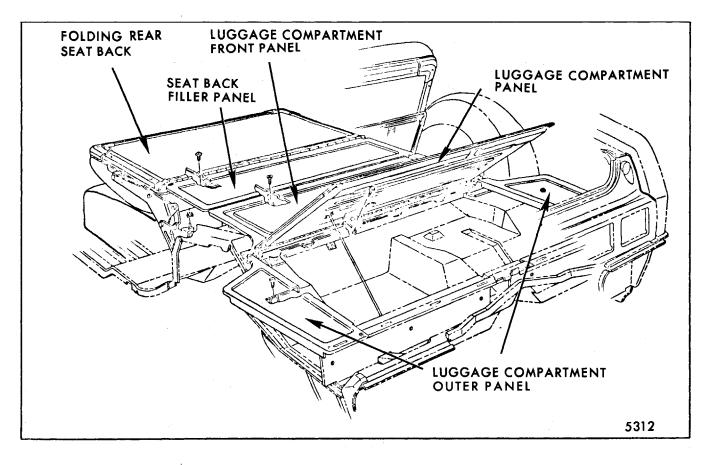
Folding Rear Seat and Load Floor Panels - X-17 Style Shown (H-07, 15, 27 and 77 Styles Typical)
